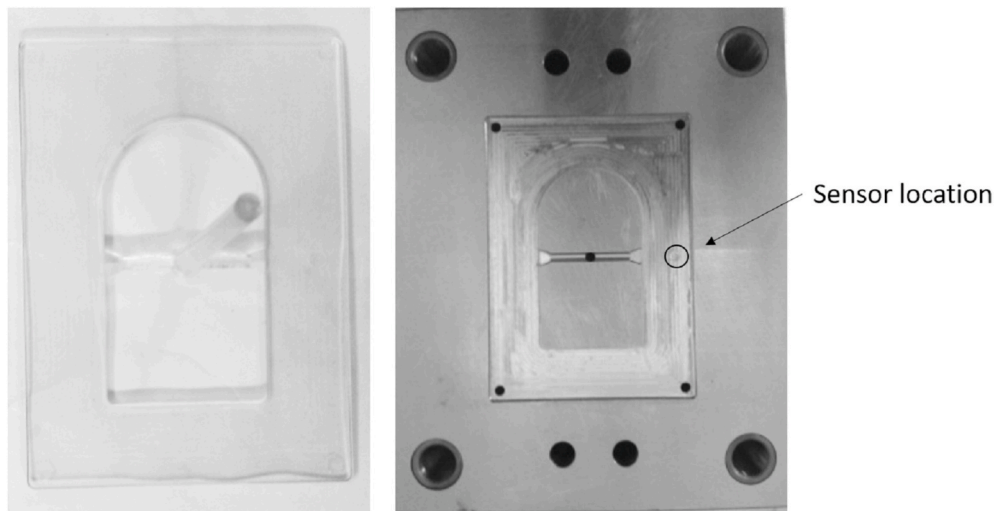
a) Experimental specimen injected in this work b) Mobile half-mould. Black point shows integrate pressure and temperature sensor location.
